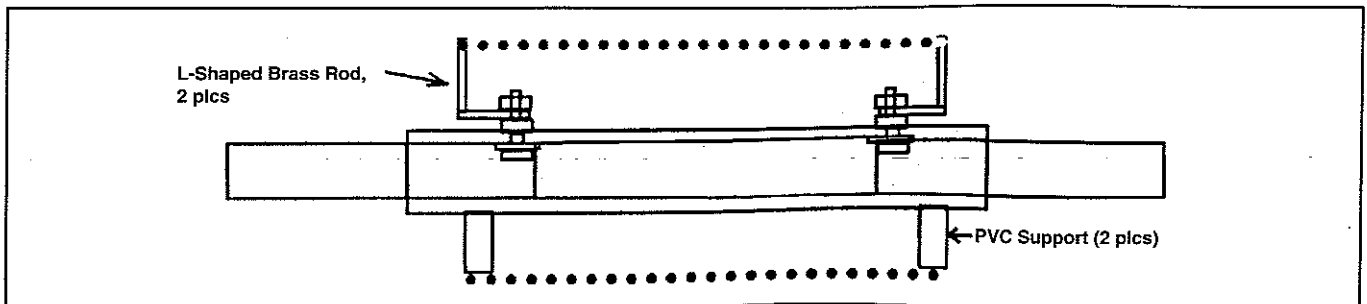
A cutaway view of the 160 meter coil assembly showing the coil support system.
